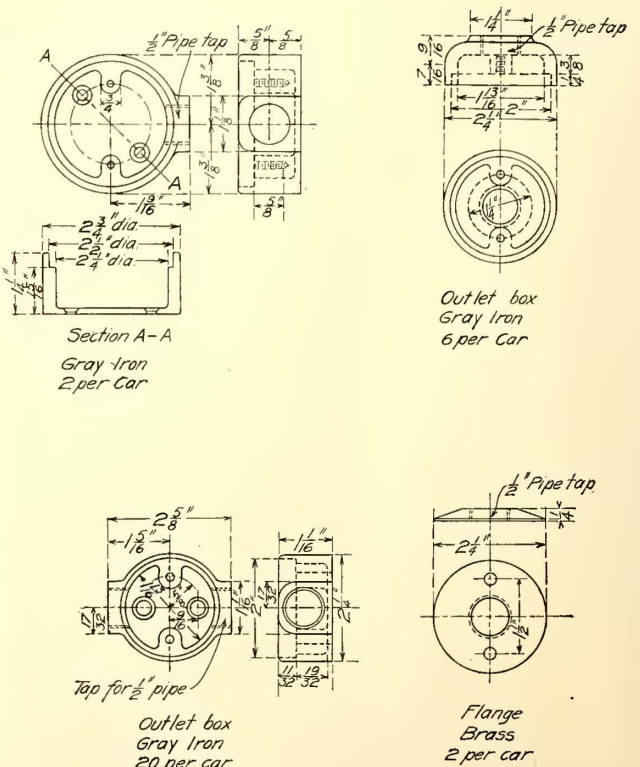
CONSTRUCTION DETAILS OF OUTLET BOXES
